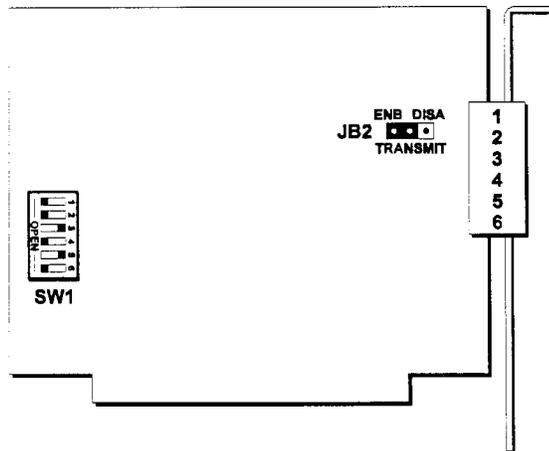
5136-SD2 Card Jumper and Switch Locations
